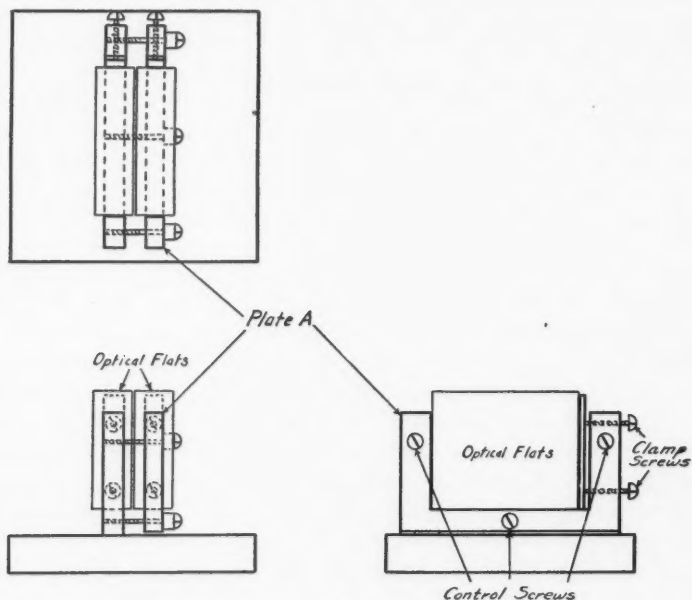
Diagrams showing the mechanical arrangement for mounting and adjusting the optical flats in the indicometer.
